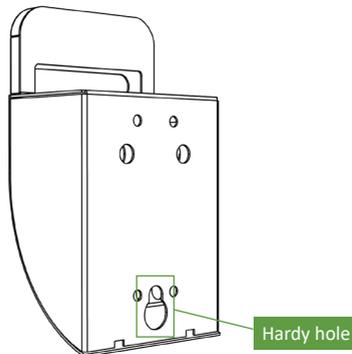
schematic diagram of hoist hole at the rear of charging connector placement assembly1
